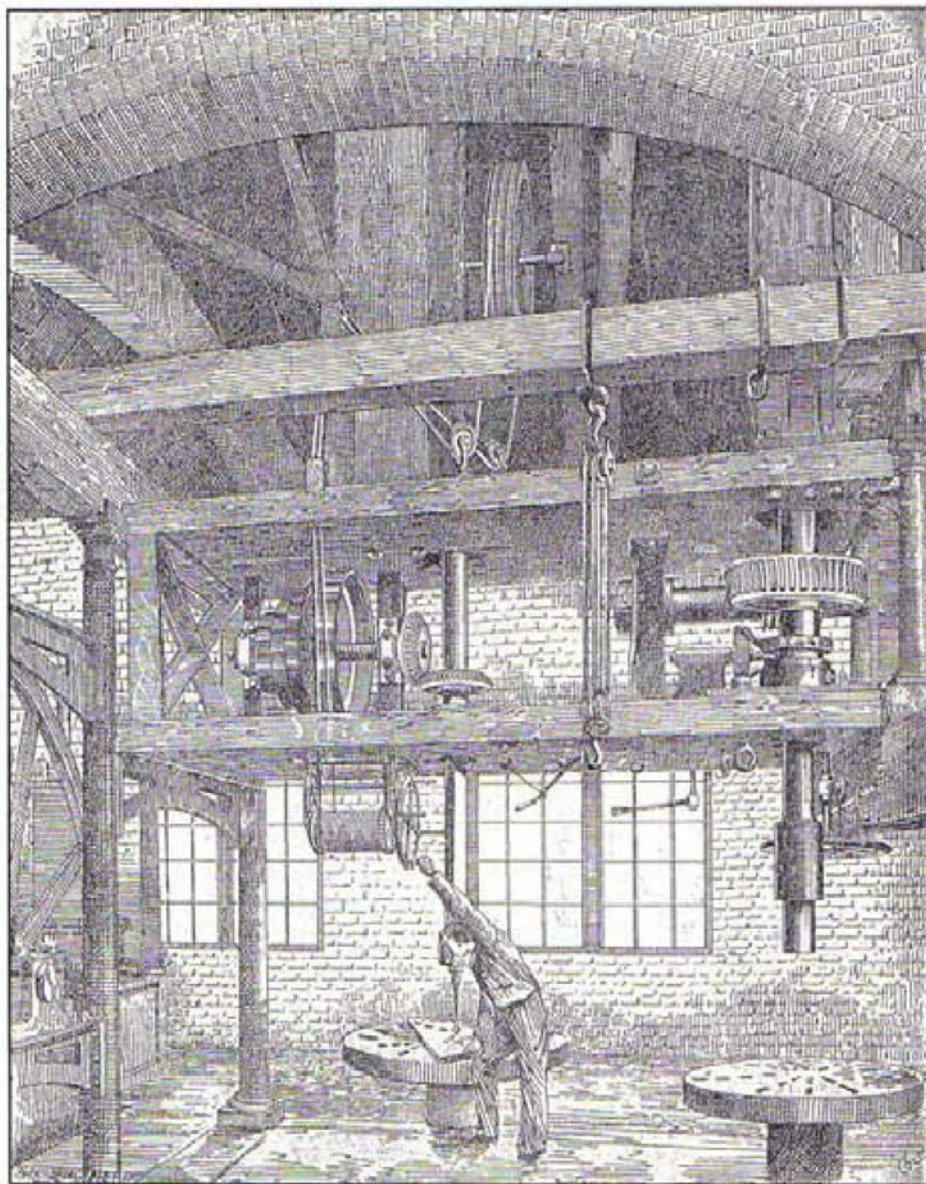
Soho Foundry drilling machine, c1800? *Engineer*, 1895
